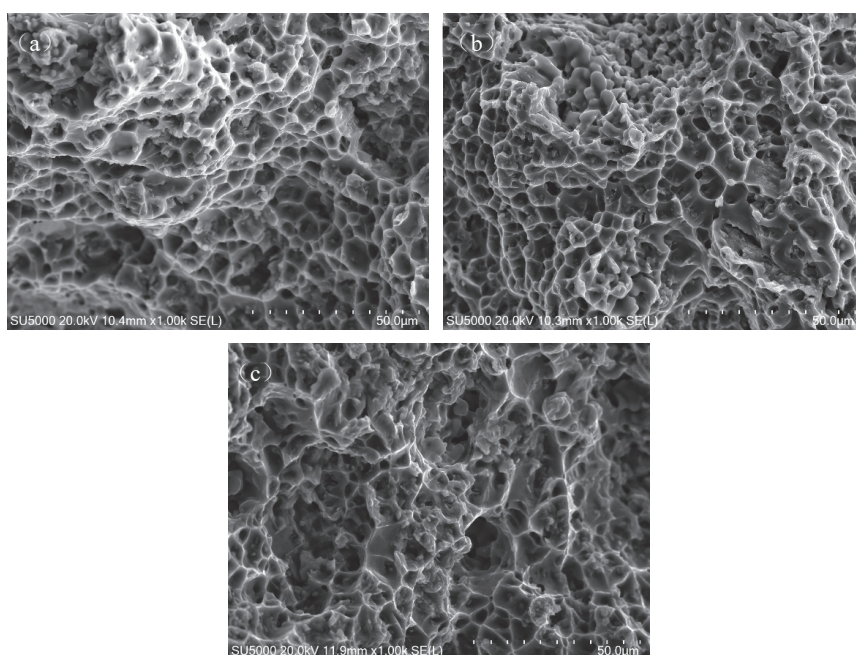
SEM micrographs of fracture surfaces of tensile samples: (a) Wire-1-welded joint; (b) Wire-2-welded joint; and (c) Wire-3-welded joint.
